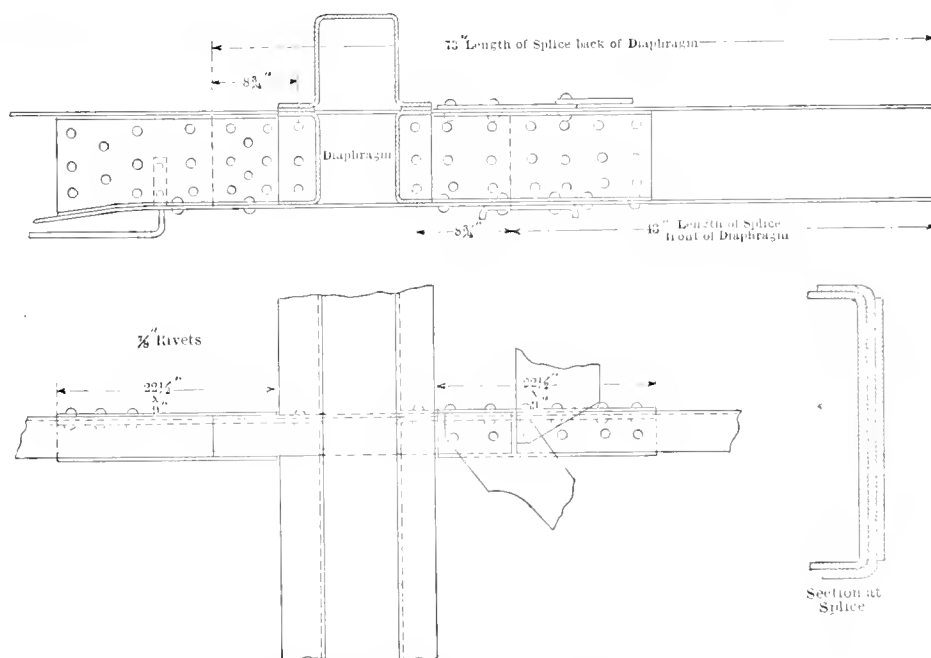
METHOD OF SPICING CENTER SILLS BOTH IN FRONT AND BACK OF THE BOLSTER ON CLASS N-8 HOPPERS.
